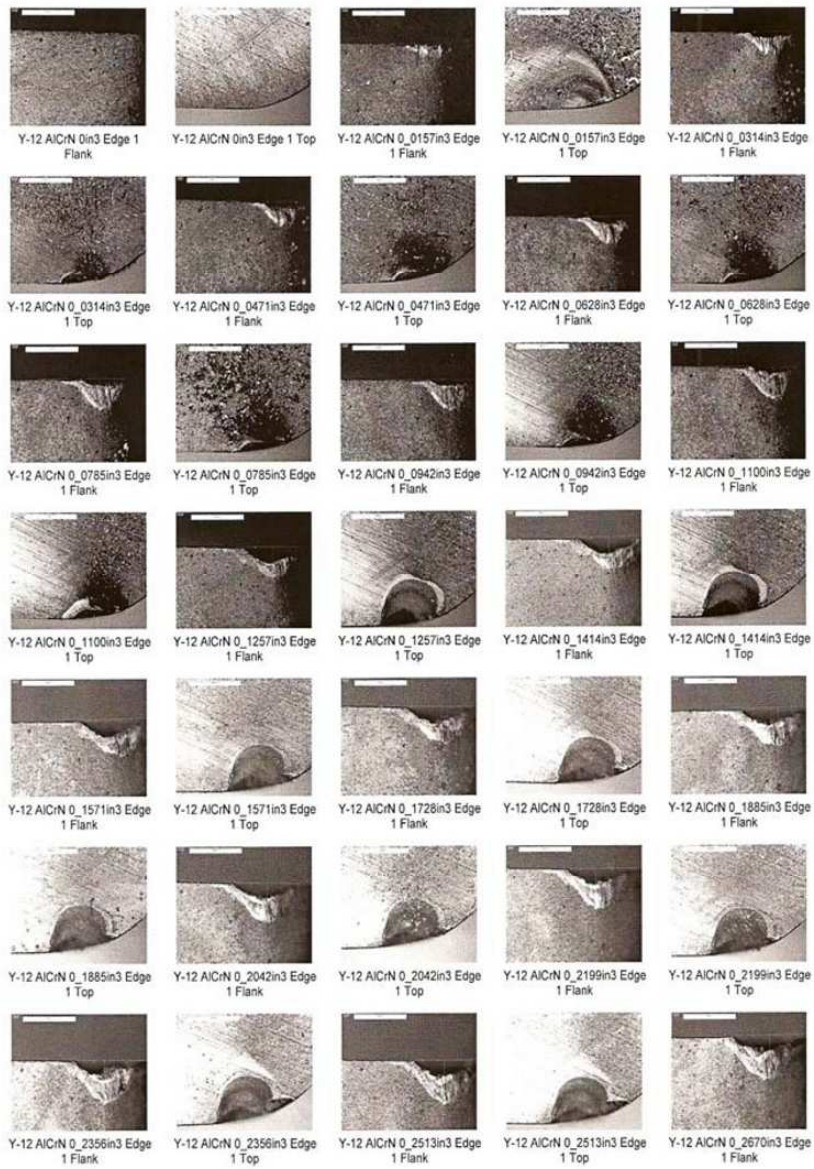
AlCrN Tool Cutting Edge 1 machined at 121 RPM. 0 - 0.2513 in³ workpiece removed
